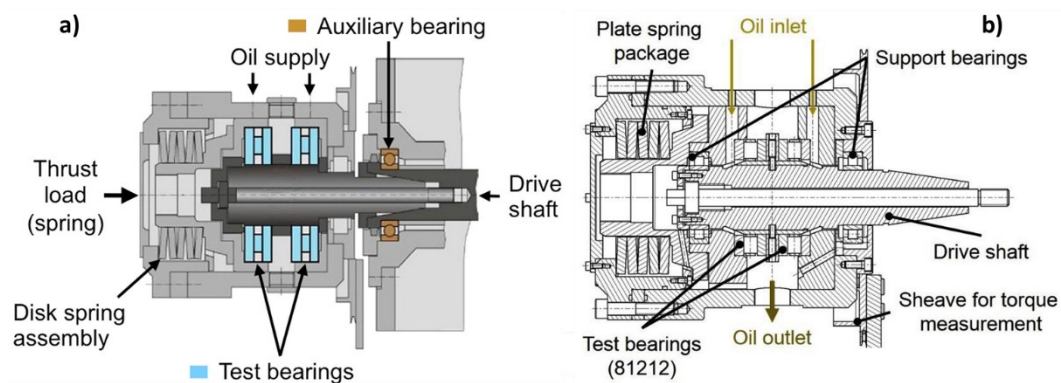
FE8 test rig equipped with two thrust test bearings, (a) without auxiliary support bearing [128]; (b) with auxiliary support bearing to bear radial loads. From [129].
